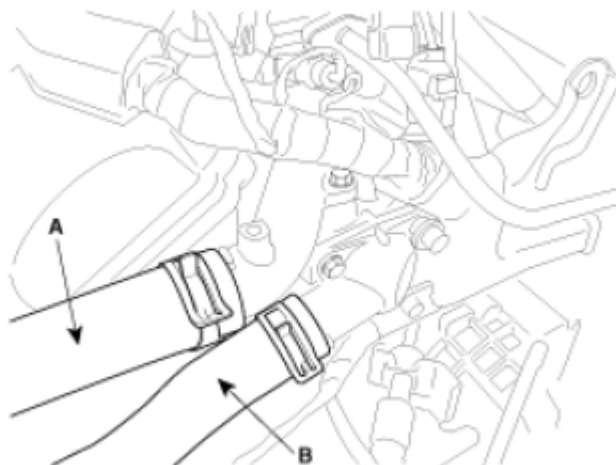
Identifying Upper Radiator Hose And Lower Radiator Hose
